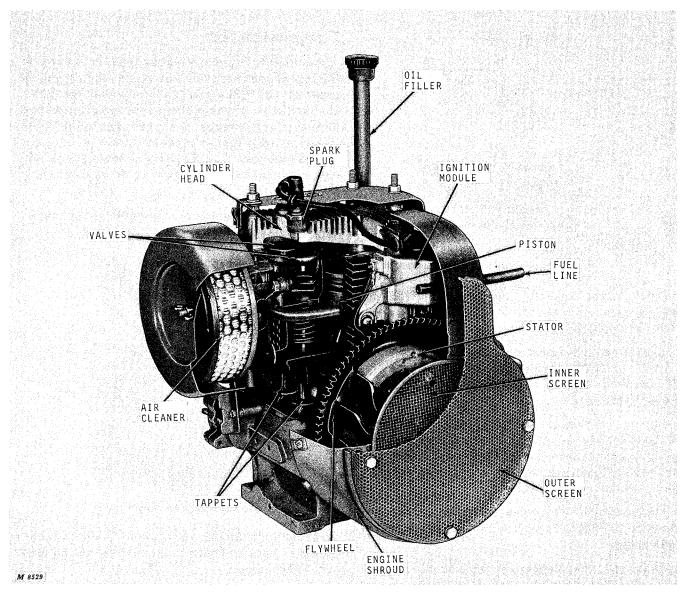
Cutaway View of Tecúmseh HH100 Engine Showing Piston, Valves and Tappets
